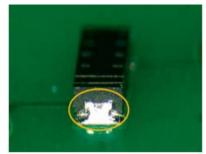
Example DFN1608 appearance of side wettable flanks after soldering
